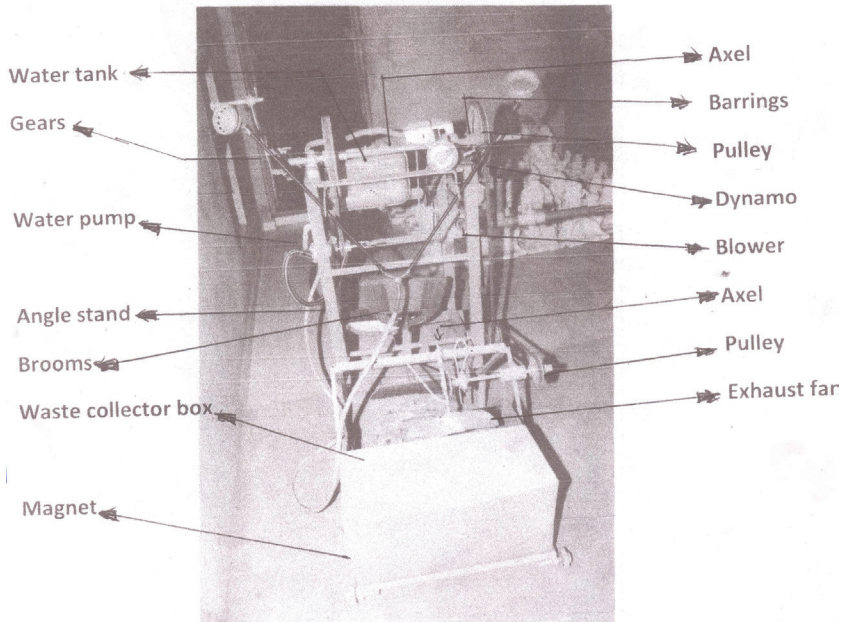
Waste Cleaner, Water Sprayer and Insecticide Dusting
